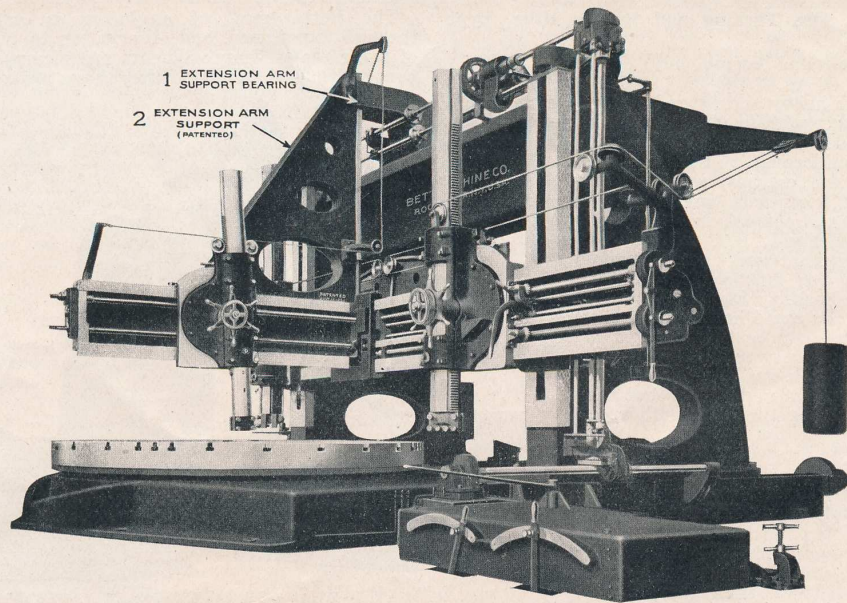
BETTS HEAVY DUTY EXTENSION BORING AND TURNING MILL, TYPE A2200
